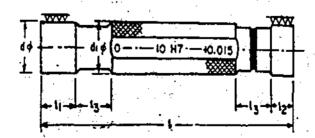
Solid Type double-ended plain plug gauge (Reproduced from IS: 3484)
